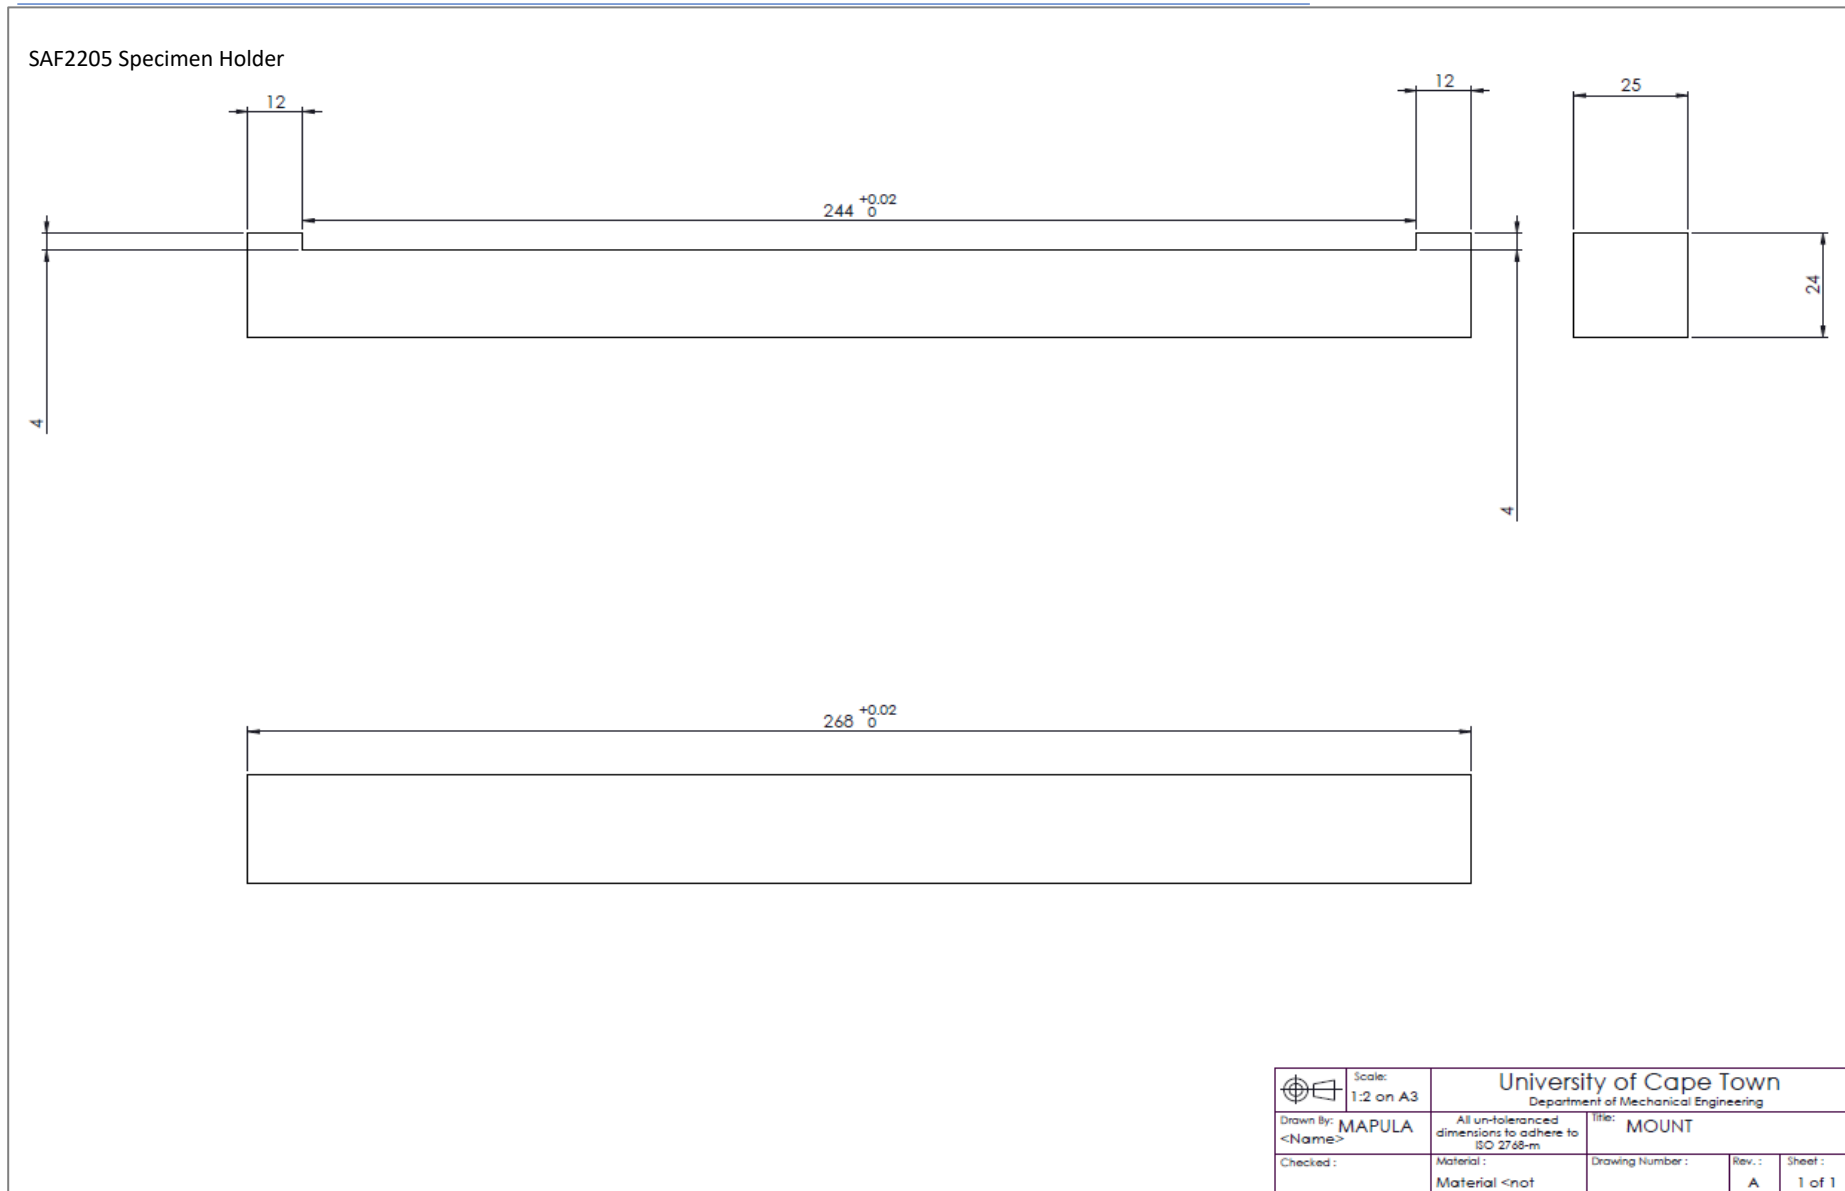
Geometry for SAF2205 bent-beam specimen holder
